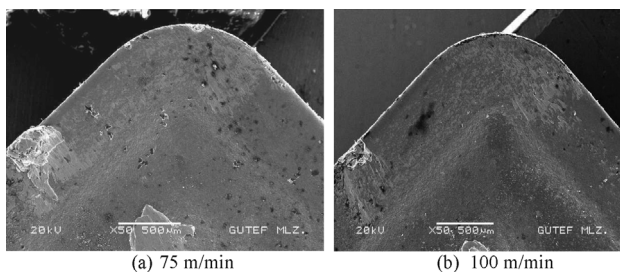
Cutting-edge radius used for the test samples machined at cutting speeds of: a) 75 m/min and b) 100 m/min
